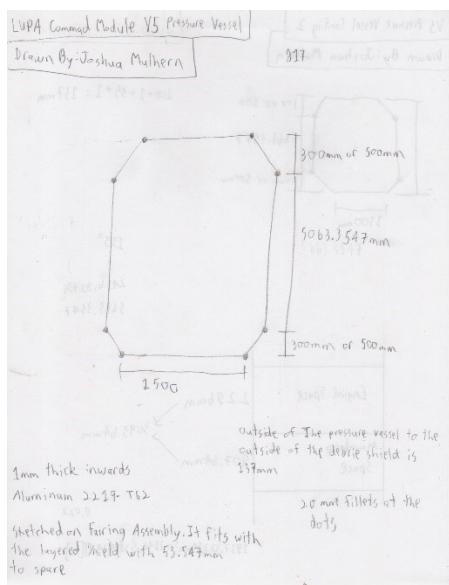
Hand Drawing LUPA Command Module V5 pressure vessel
